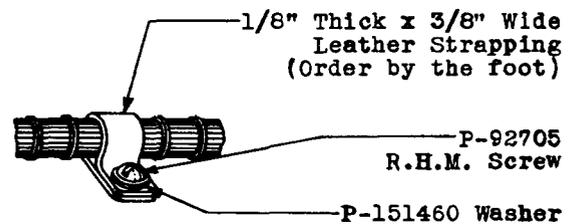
Cable Support Parts (Nos. 168B and 170A Interrupters)
